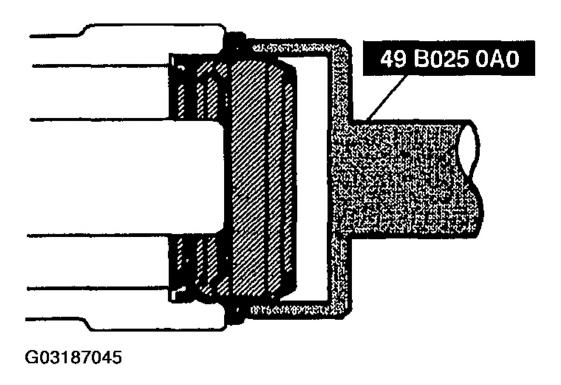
Installing Oil Seal Courtesy of MAZDA MOTORS CORP.
